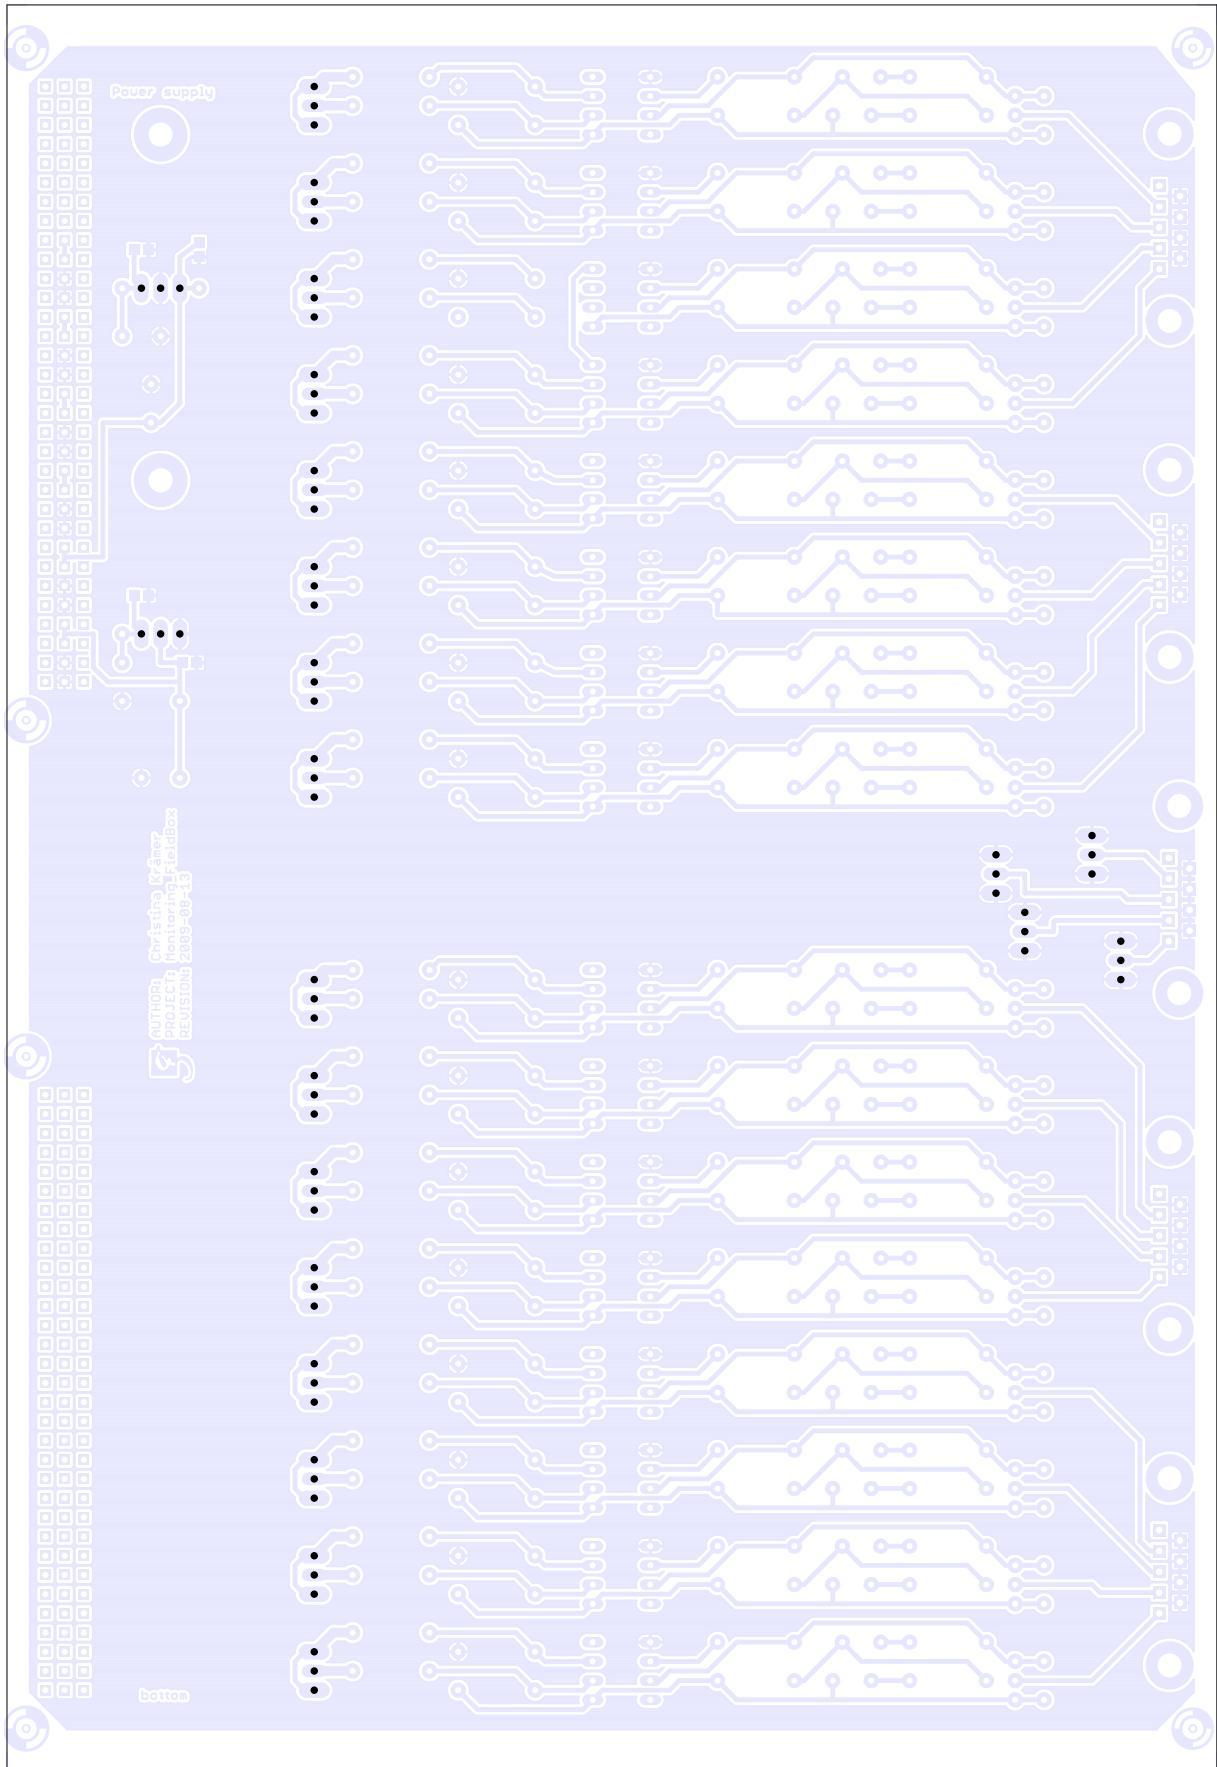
Board bottom view showing drills with 1.0 mm (0.039 in) diameter
